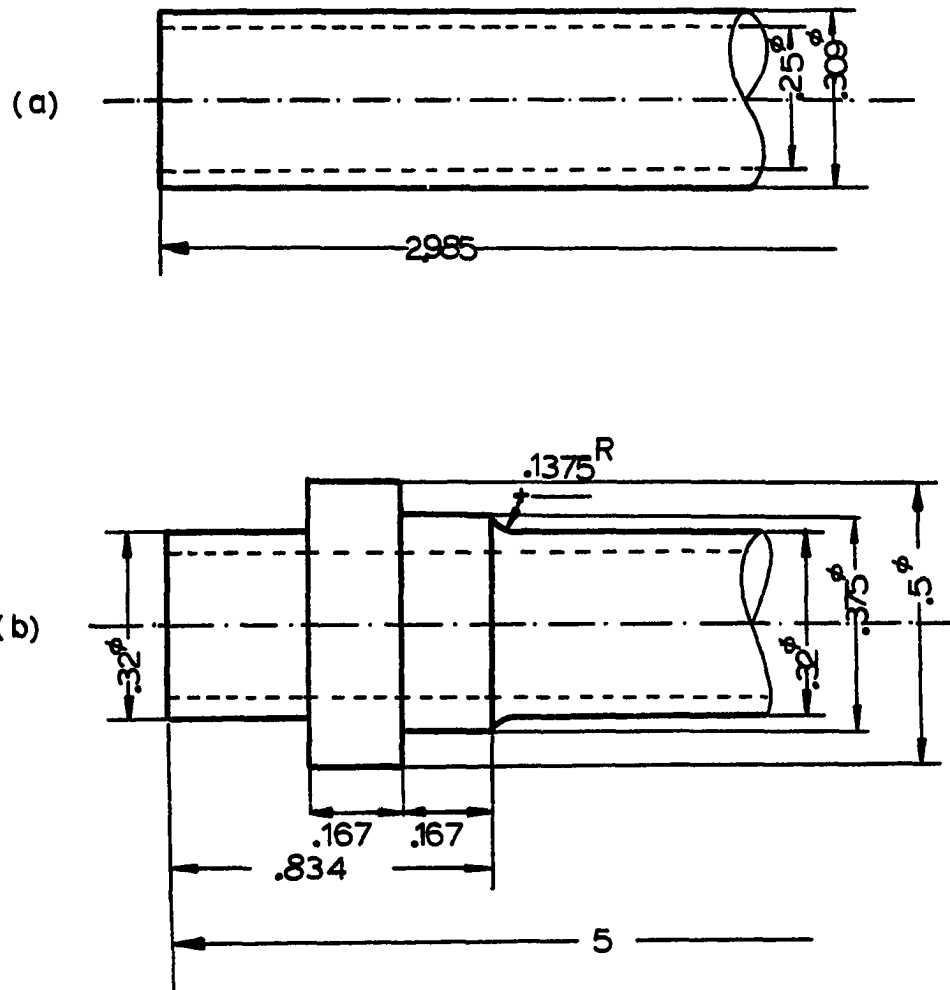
Schematic drawing of tube P0-4(a) and tube P8-1(b). All dimensions are in inches.
